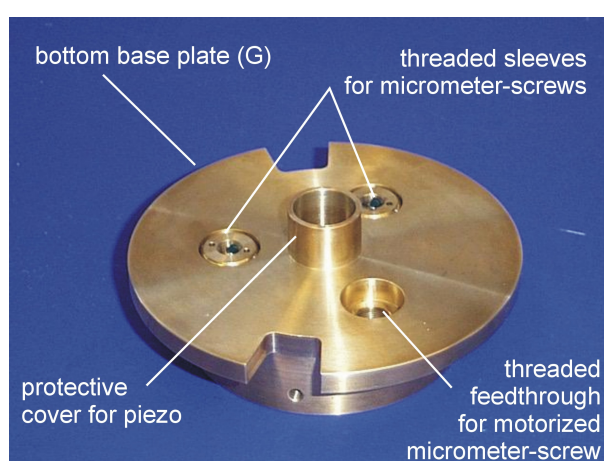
Detailed view of the bottom base plate, containing already the threaded sleeves for the manual approach screws. The motorized screw is missing. The upper base plate has to fit onto these screw. The center protrusion fits through the center hole of the upper base plate and will enclose the piezo to protect it from mechanical damage.
